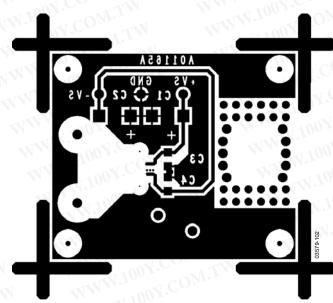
Example Layout—Bottom Layer of the AD8220 Evaluation Board
